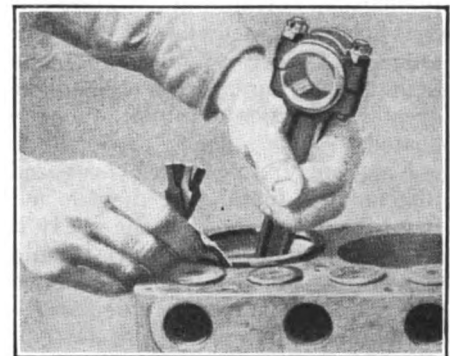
FINDING THE PISTON CLEARANCE WITH A THICKNESS GAUGE
